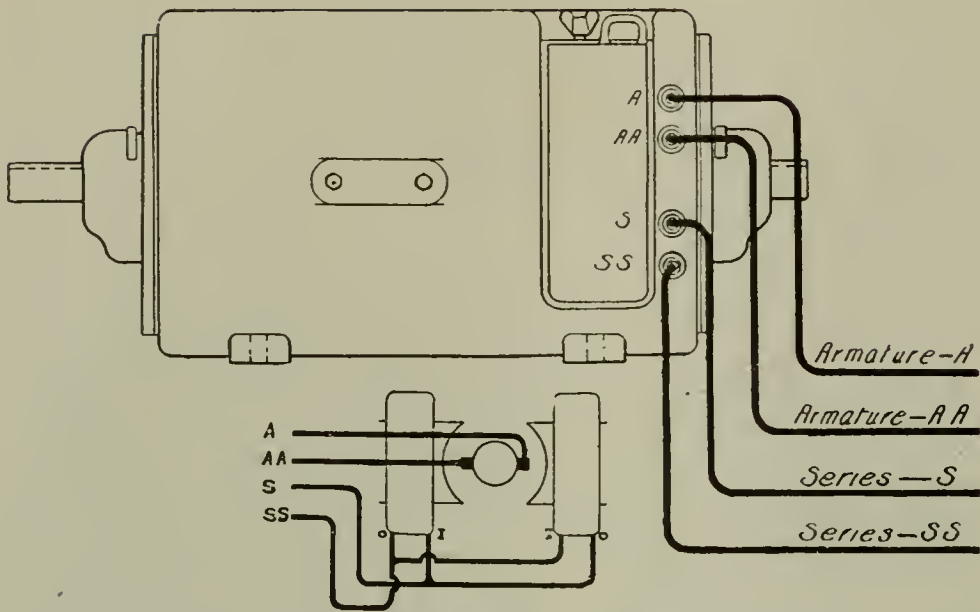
SIZE 2½K AND 6K SERIES MOTOR. FIELDS IN PARALLEL. CROCKER-WHEELER COMPANY.
